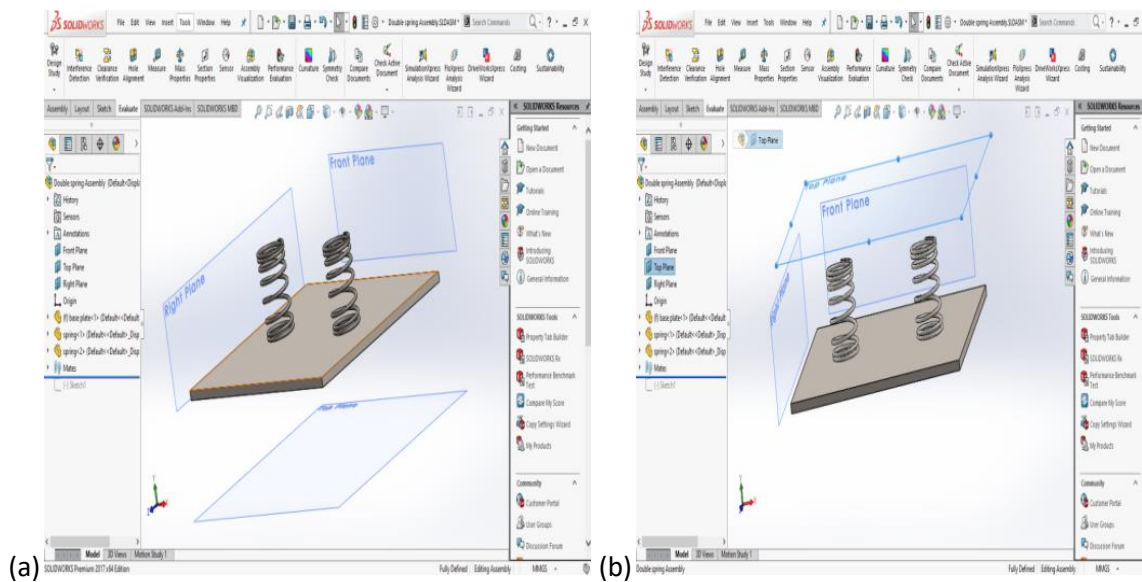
dual helical (a) alloy-steel springs and, (b) spring steel springs
